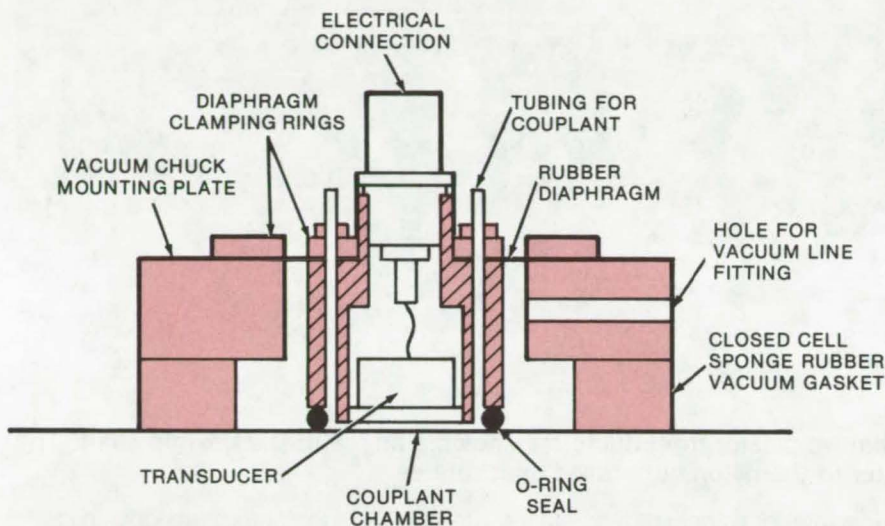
Vacuum-Attached Transducer for nonporous surfaces has a rubber diaphragm that lets it adjust to nonflat surfaces. Tubes admit and remove a liquid acoustic couplant.
